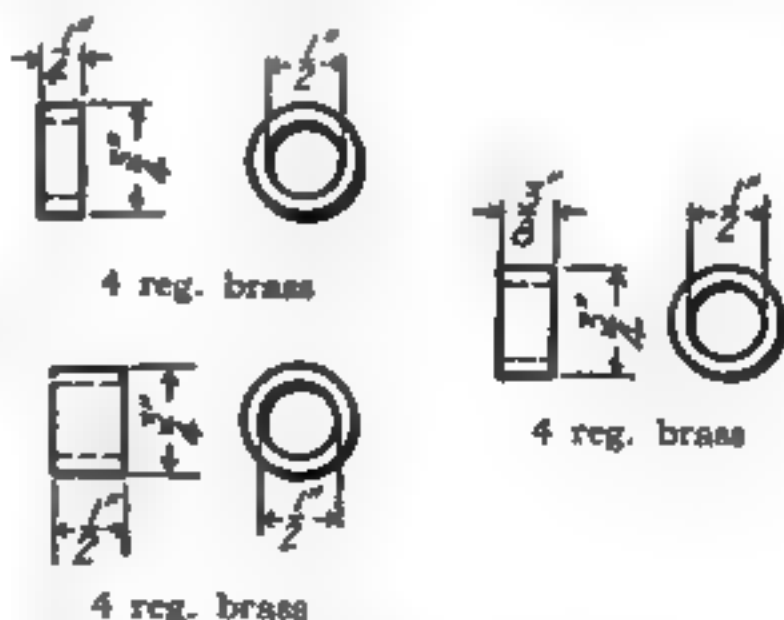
Dimensions of the collars which are forced over the tubes and soldered in place gripping the lens-board
